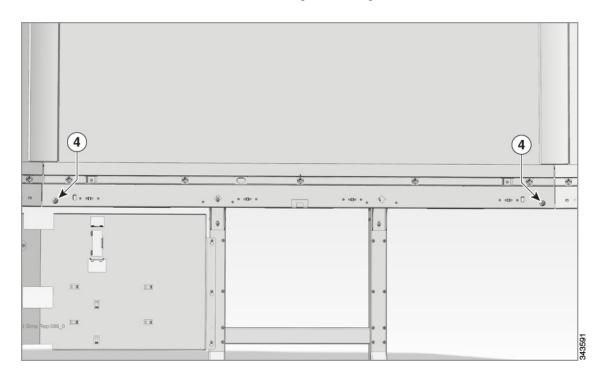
Facade Bracket Installation (5 of 5)—Securing the Joining Screws
